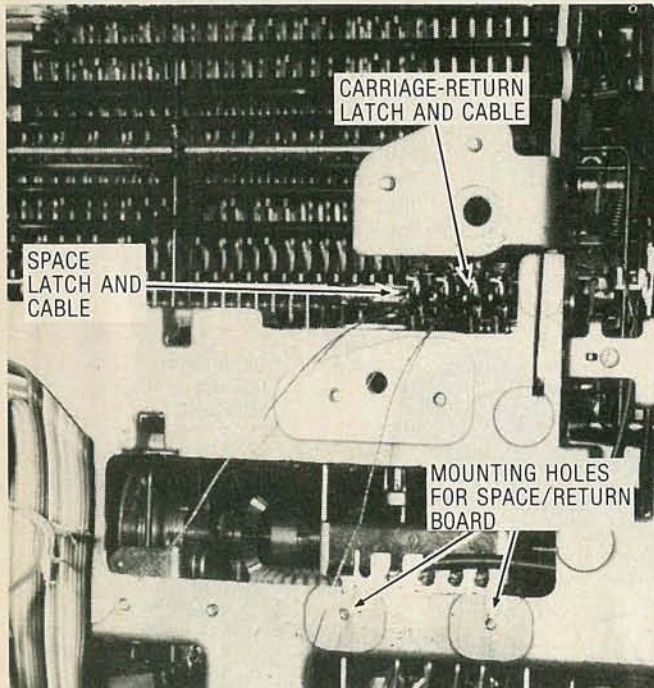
MOUNTING OF THE space and carriage-return cables.
